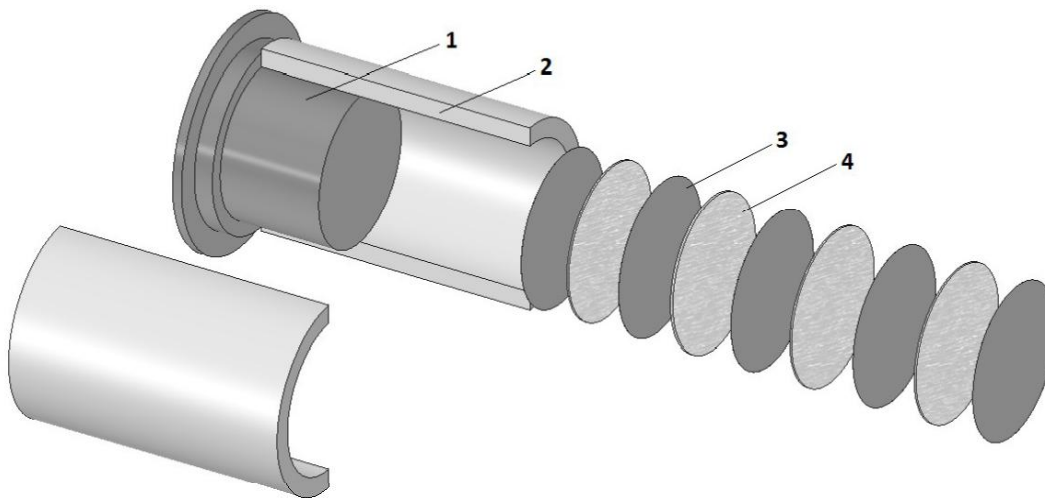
Exploded view of the primary test section components and multilayer insulation (MLI) test sample.
